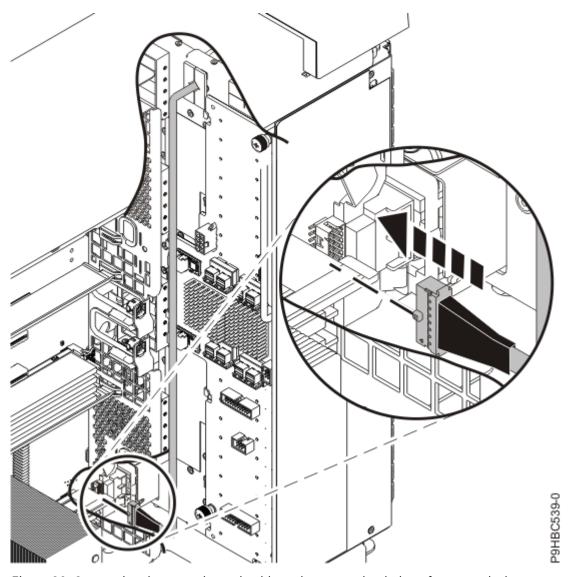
Connecting the control panel cable to the system backplane for a stand-alone system
